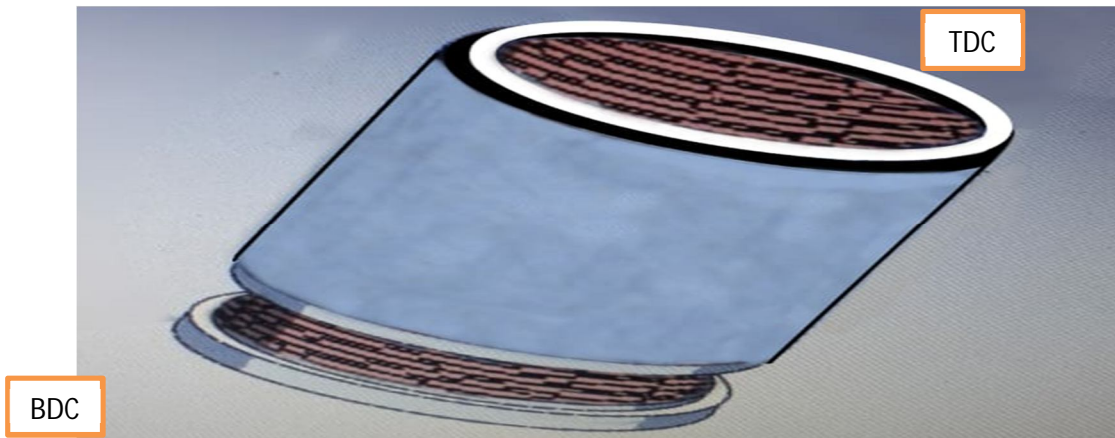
Solenoid fitted inside the cylinder at TDC and electromagnet is fitted lower end of cylinder at BDC
